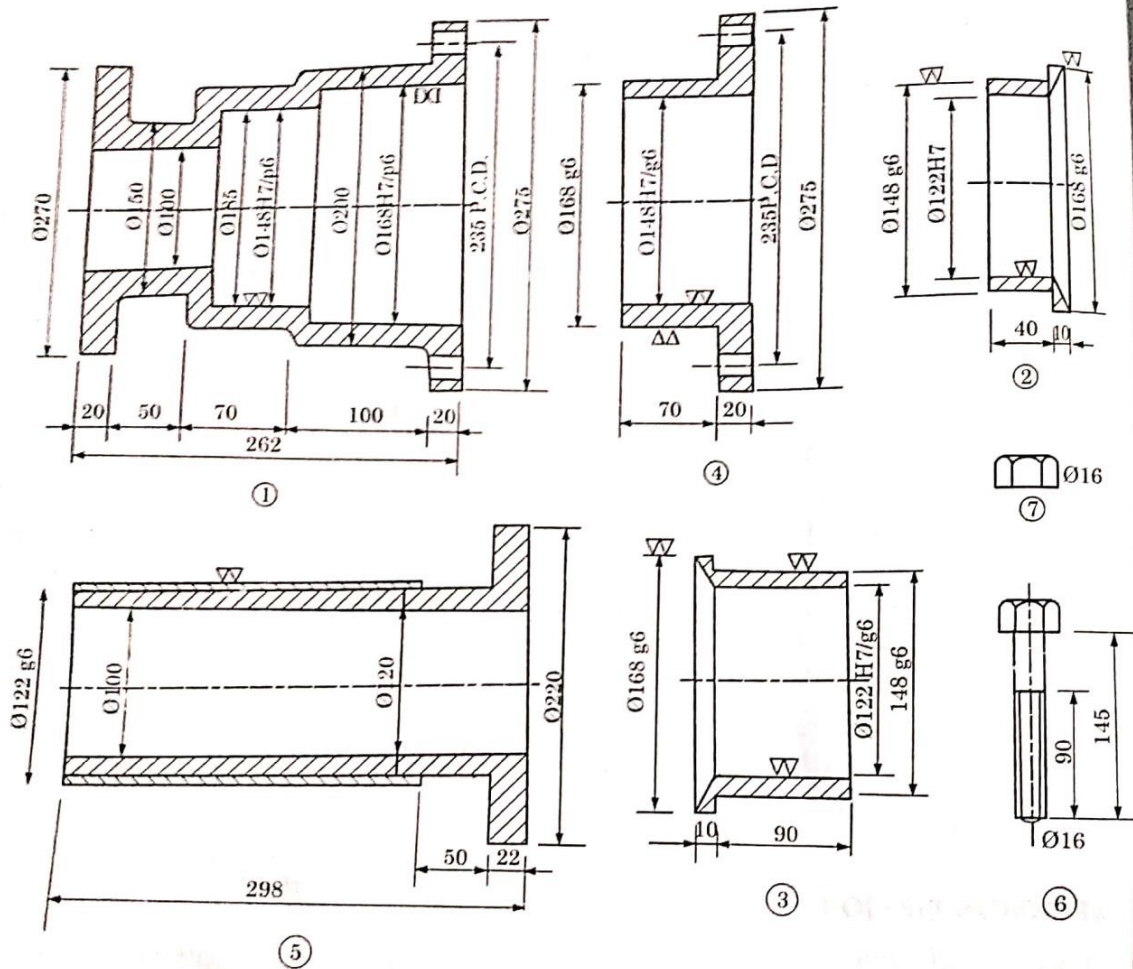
(a) : Detail Drawing of Expansion Pipe Joint
